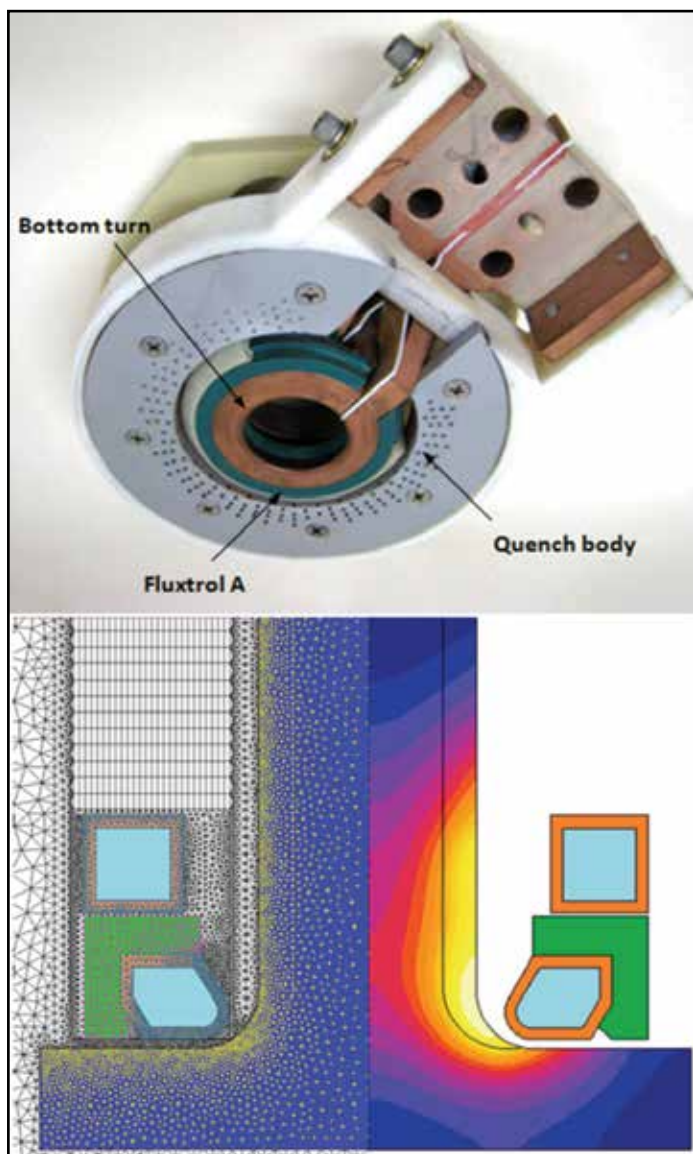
(a) Full assembly of a two-turn shaft scan coil with quench body, (b) fillet area of shaft modelled with Flux2D
